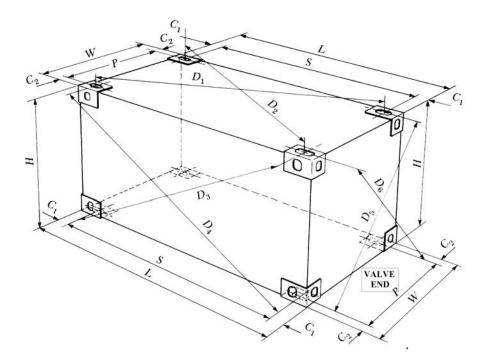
Tank Container Dimensional Reference (Ref. 3)
